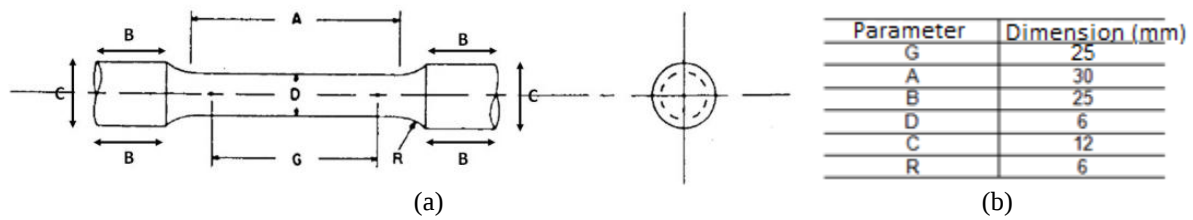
(a) Tensile specimen drawing, and (b) is dimensions according to ASTM E8M, 2008.
